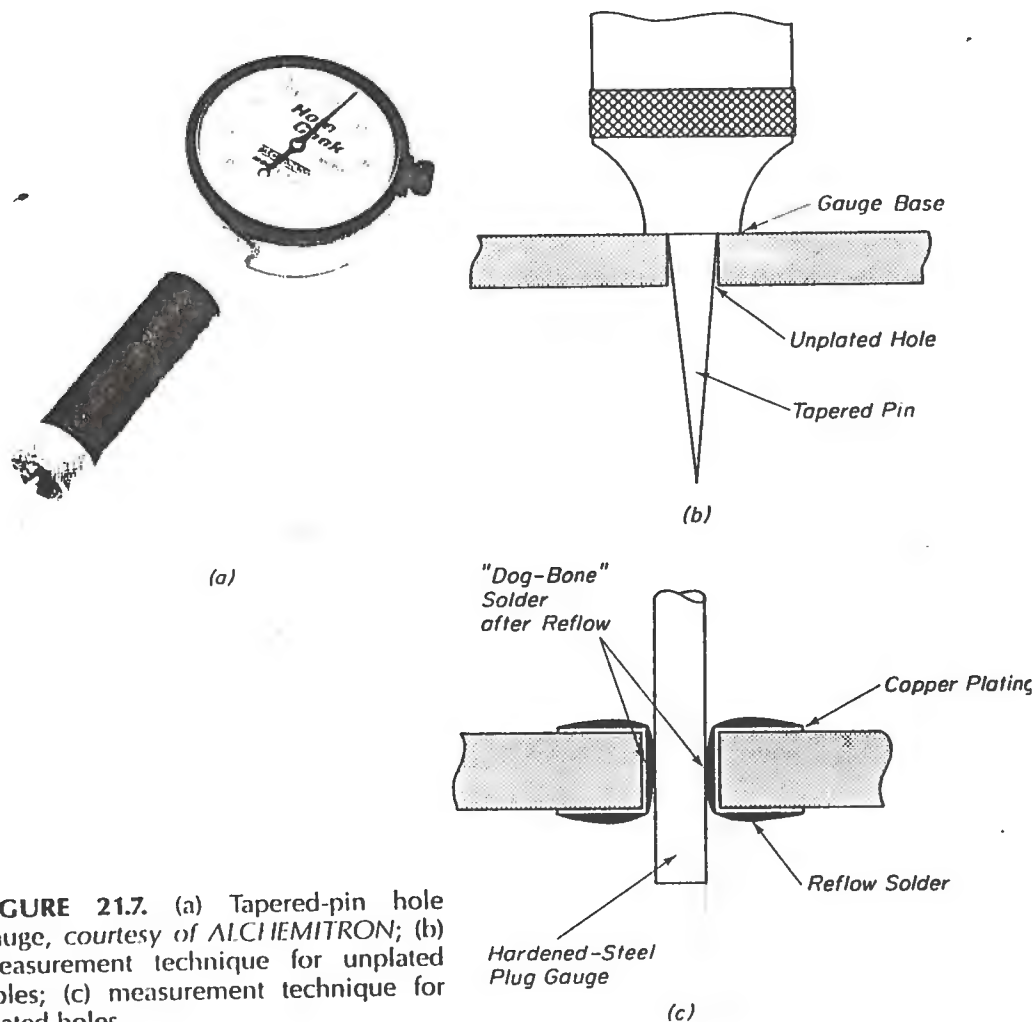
(a) Tapered-pin hole gauge, courtesy of ALCHMITRON; (b) measurement technique for unplated holes; (c) measurement technique for plated holes.
